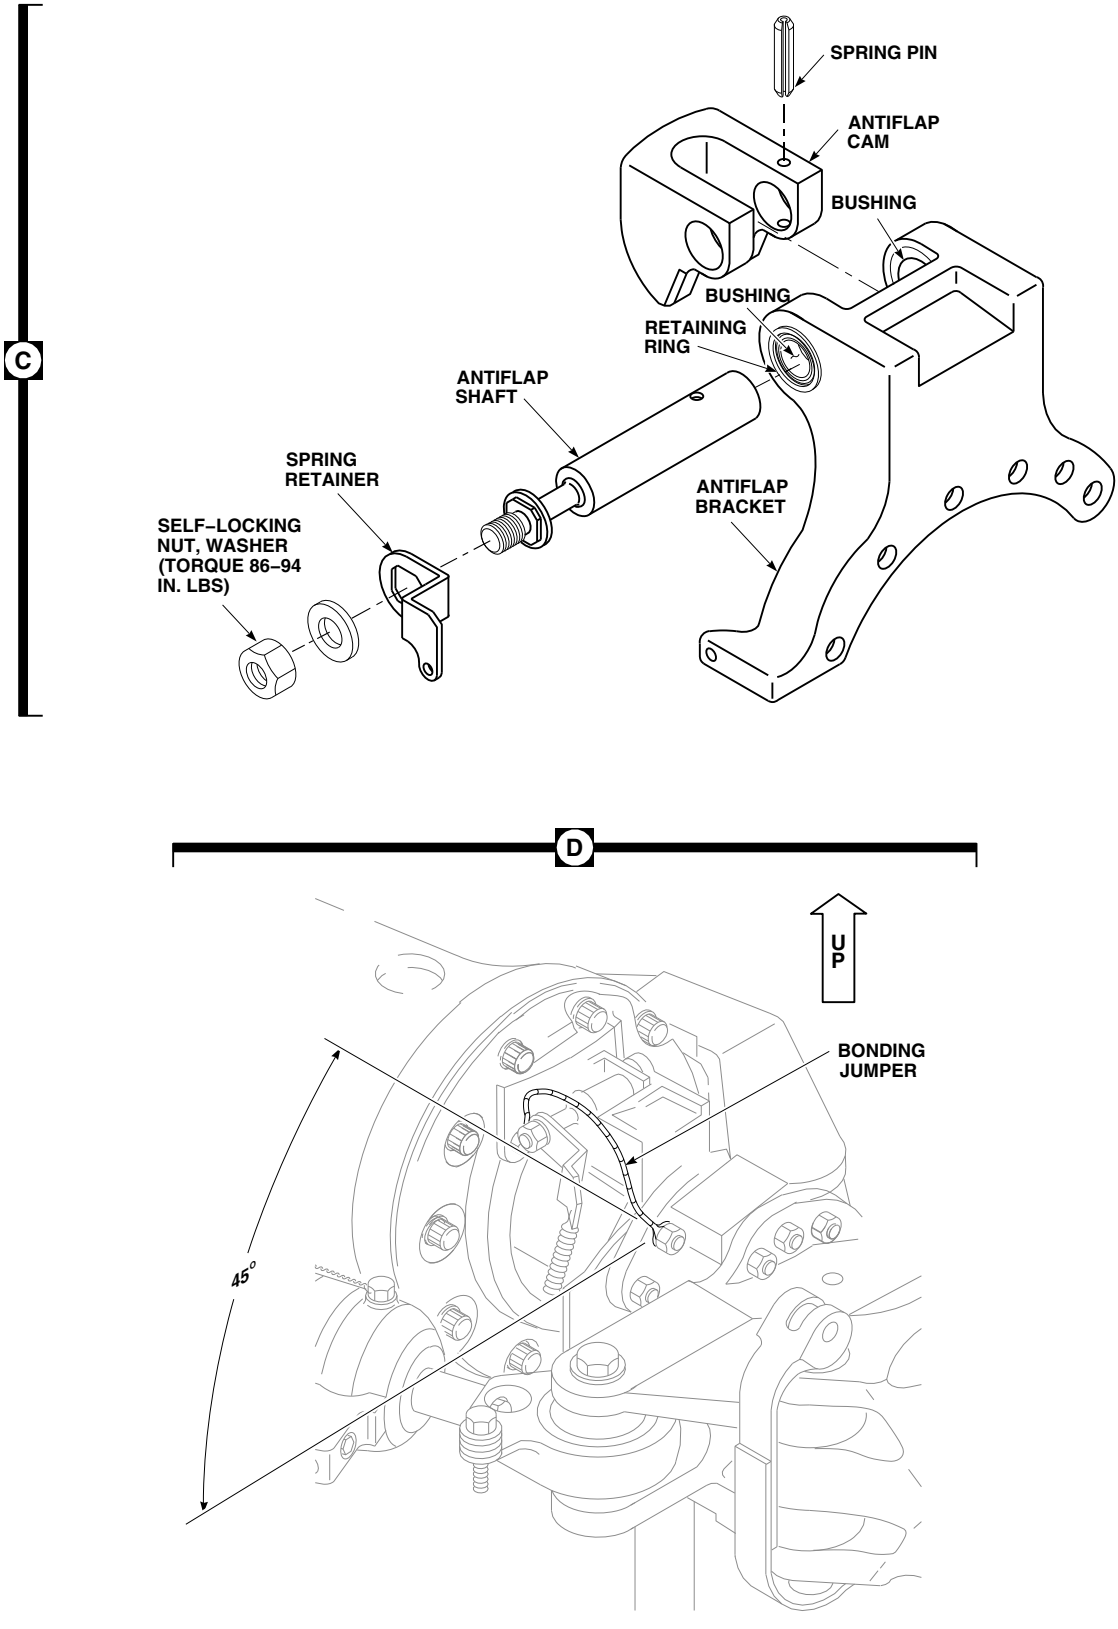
REPLACE ANTIFLAP ASSEMBLY (SHEET 2 OF 2)
